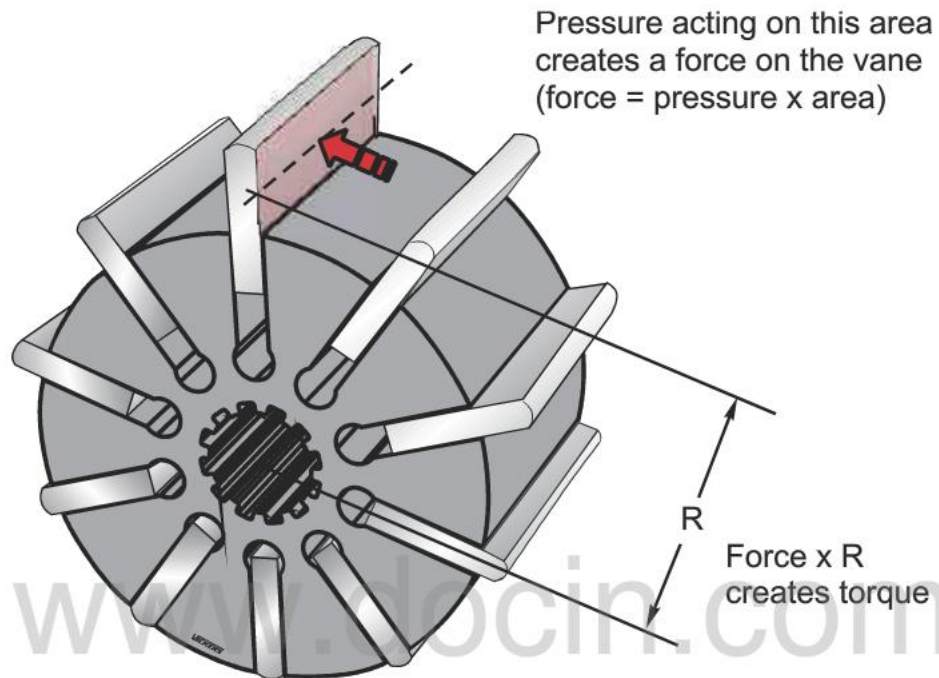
Pressure acting on a vane creates torque on the drive shaft
